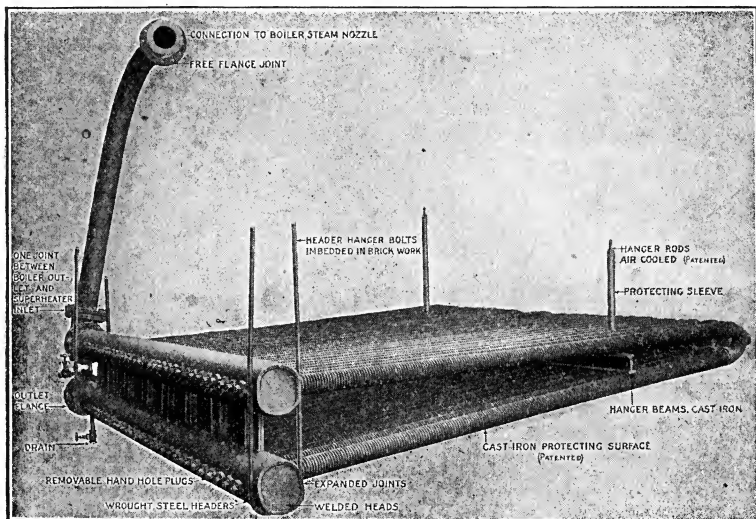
,027.—Foster superheater assembled for use in horizontal water tube boiler with vertical baffling.
